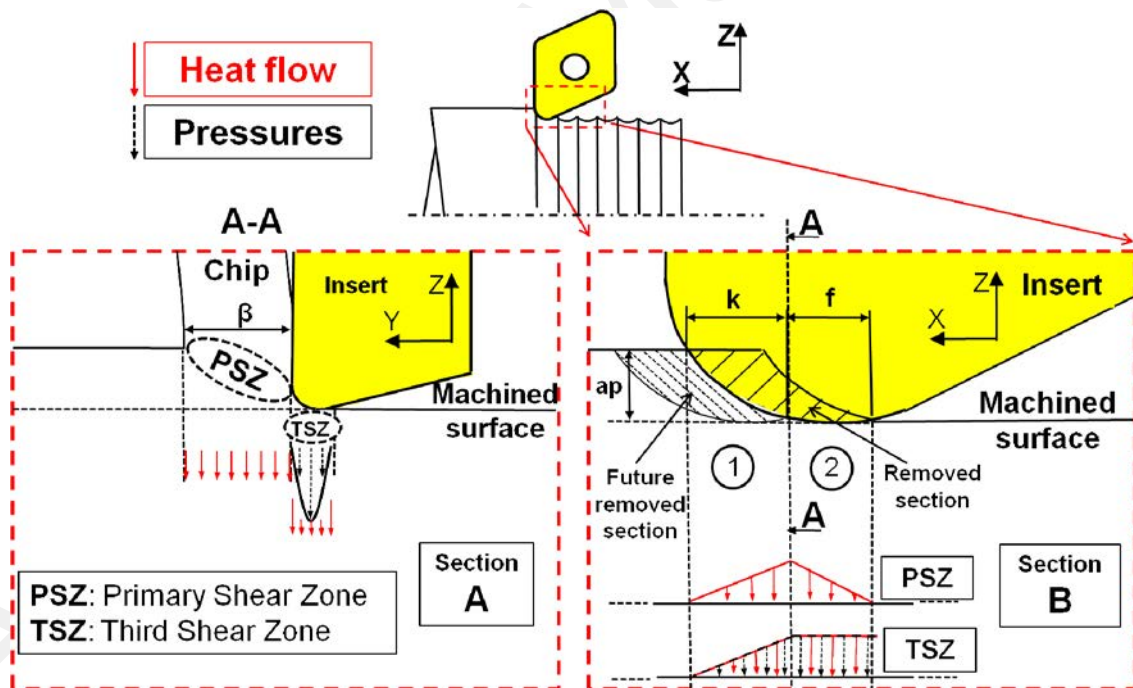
Thermo-mechanical loadings at the ‘tool – machined surface’ interface.
